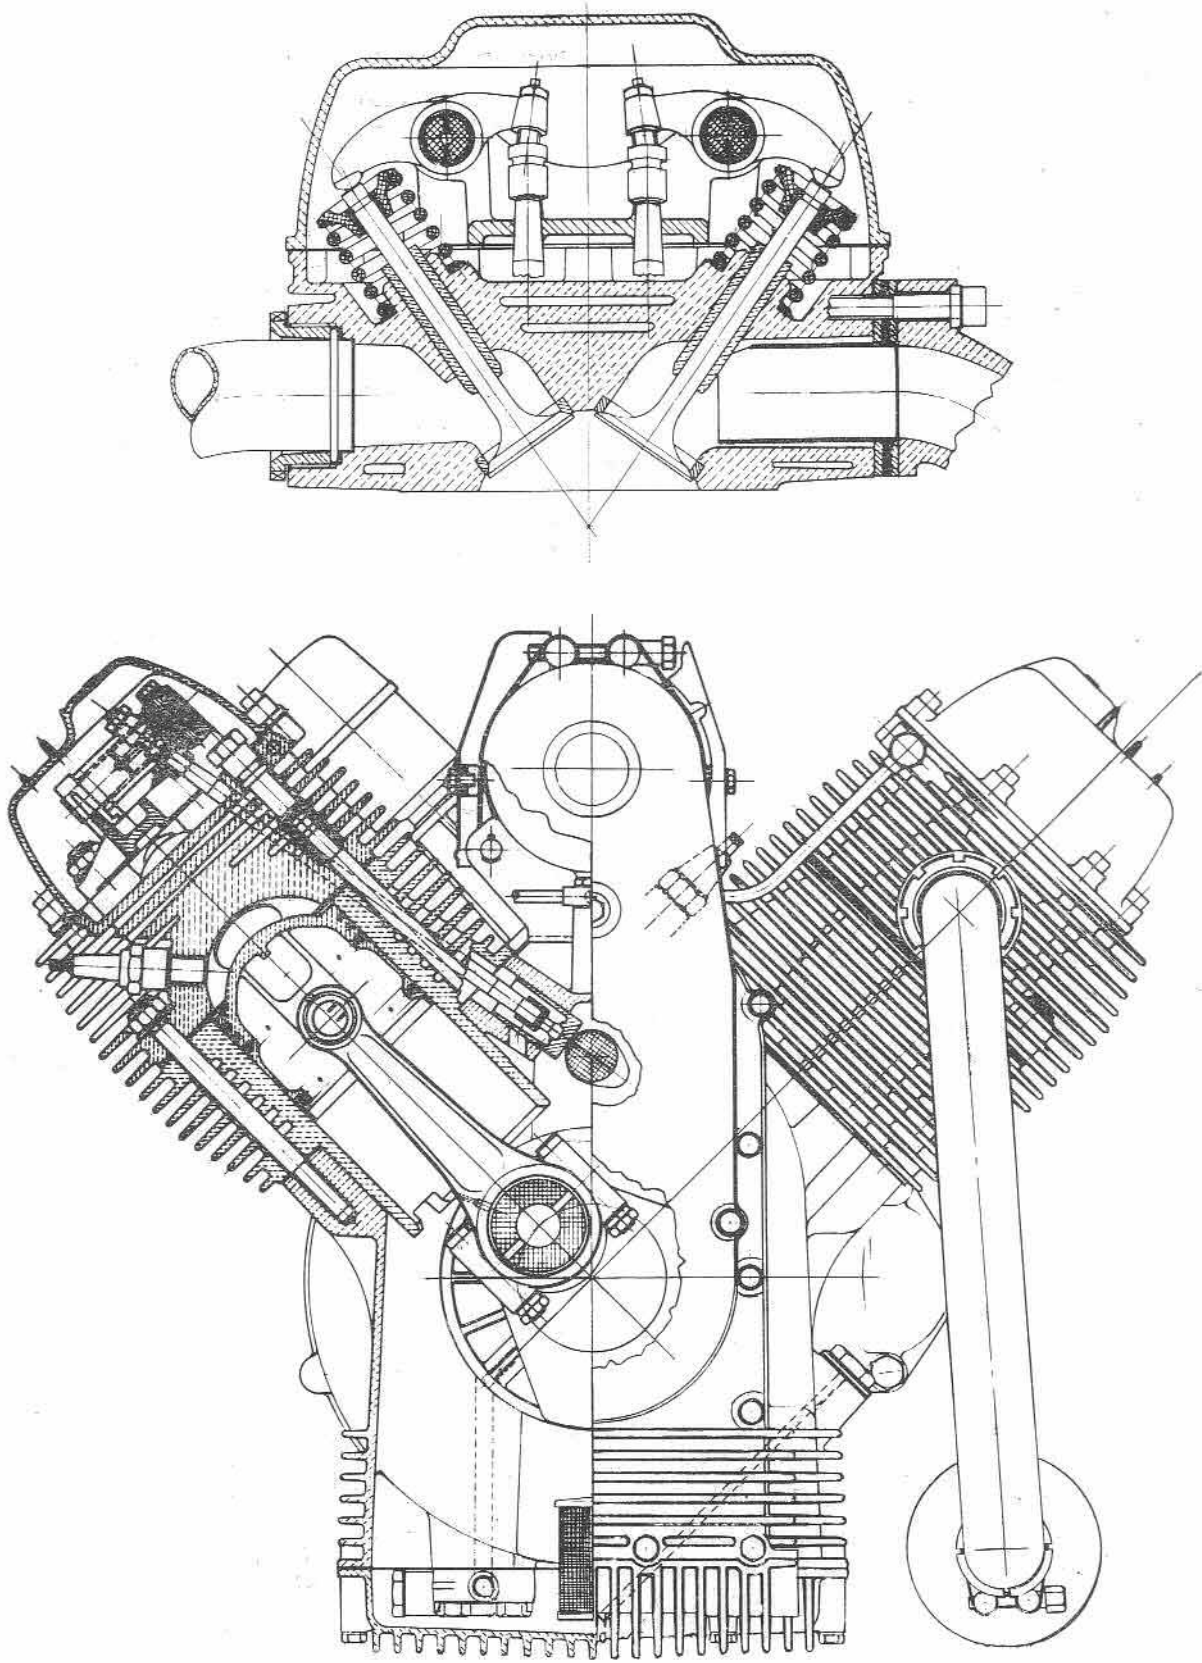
Front view of engine showing sectional drawing of valve gear mechanism.
